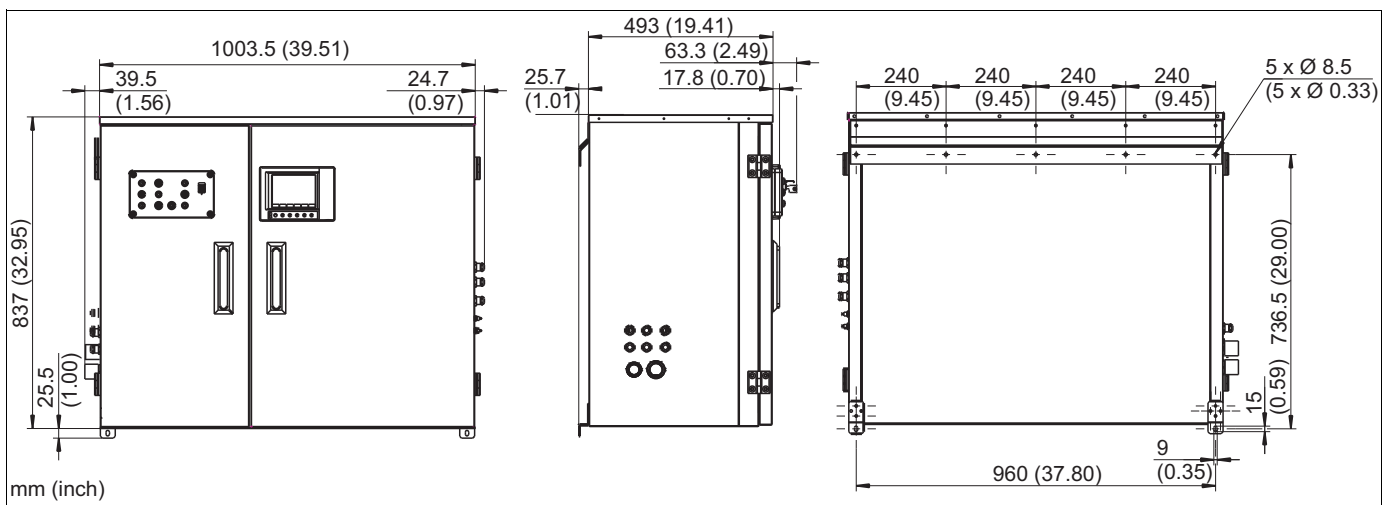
Dimensions of CYC310 housing, stainless steel version
